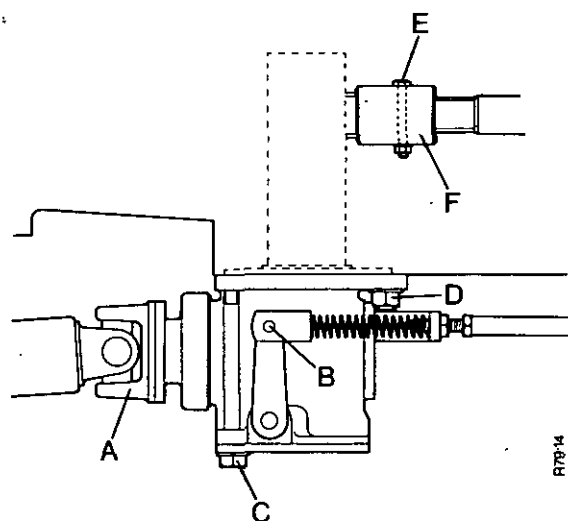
REMOVING THE TRANSFER GEARBOX
